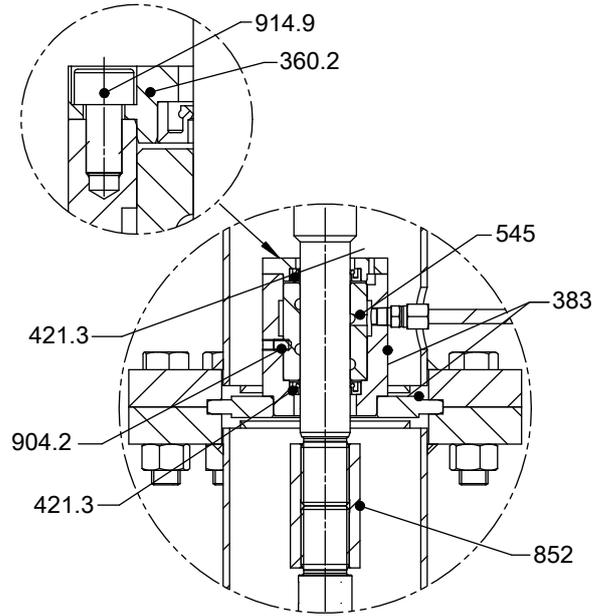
Detail drawings of screwed coupling (only for versions with 2 or 3 support columns)
